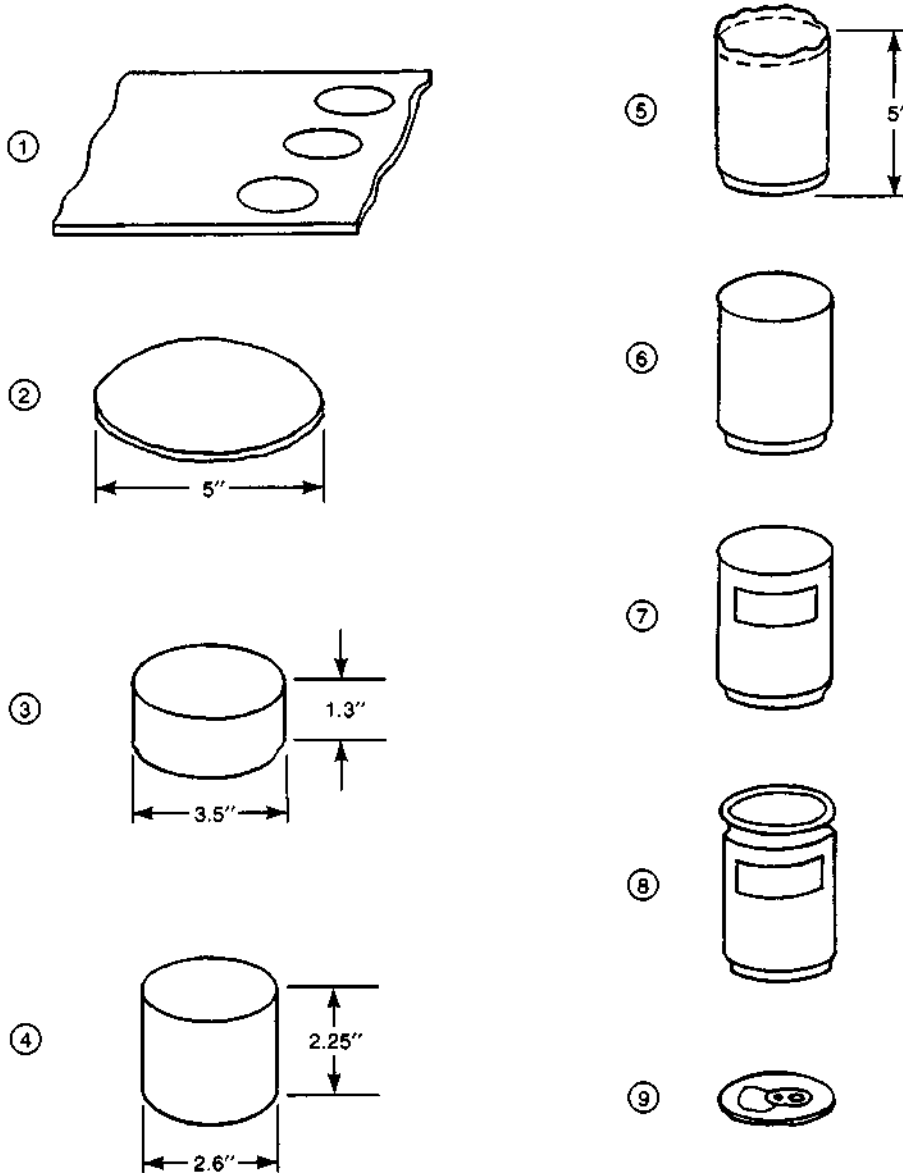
The manufacturing operation sequence for making aluminum beverage cans: 1) & 2) Discs are blanked from sheet aluminum. 3) The disc is deep drawn to a cup shape. 4) A second drawing makes the cup deeper and narrower. 5) The third drawing reduces the can's diameter to its final value and extends its length. Forming of the bottom is part of the operation. A wavy edge exists at the top of the can. 6) The wavy edge is trimmed off. 7) The can is printed in several colors with identifying information. 8) The can top is formed leaving a flange for attachment and crimping of the cover. 9) The cover is blanked, formed and assembled as a separate part, which is assembled to the can and crimped for a seal after the can is filled.
